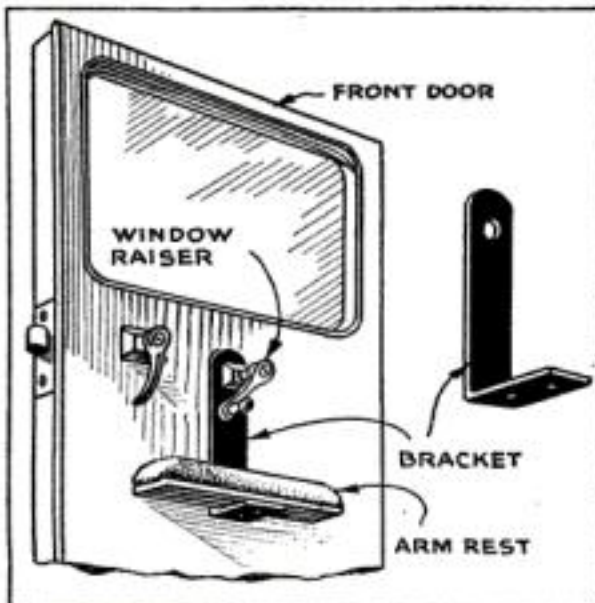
A sheet iron bracket with padded wooden strip hooks on door to form driver's arm rest.
